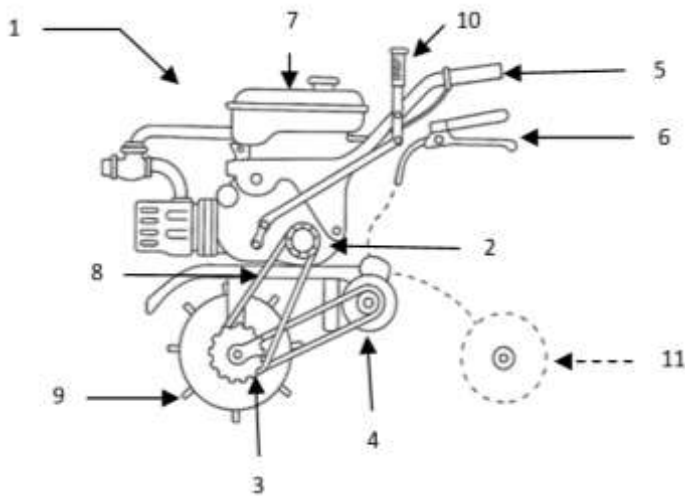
Used motorcycle engine of the weeder machine: 1-weeder machine, 2-driving gear, 3-driven gear, 4-braking disc, 5-accelerator, 6-brake handle, 7-fuel tank and 8-chain drive, 9-weeder blade, 10-selector speed lever and 11-support wheel (detachable part for sprayer unit)
